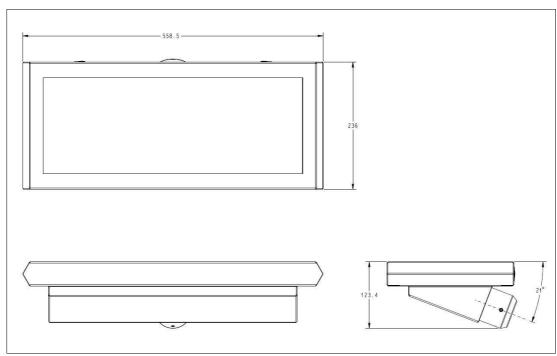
Standard housing with option F-R, prepared for pipe mounting
